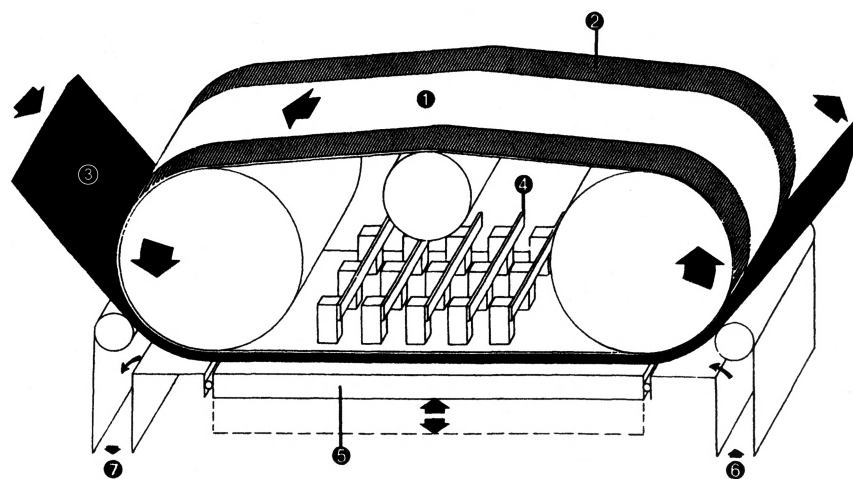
Schematic of belt cell for one-sided electrogalvanizing steel strip: (1) metal belt, (2) rubber bonded to top of metal belt, (3) continuous moving steel strip, (4) electrical contact to metal belt, (5) insoluble anode, (6) solution into cell, and (7) solution exit.
